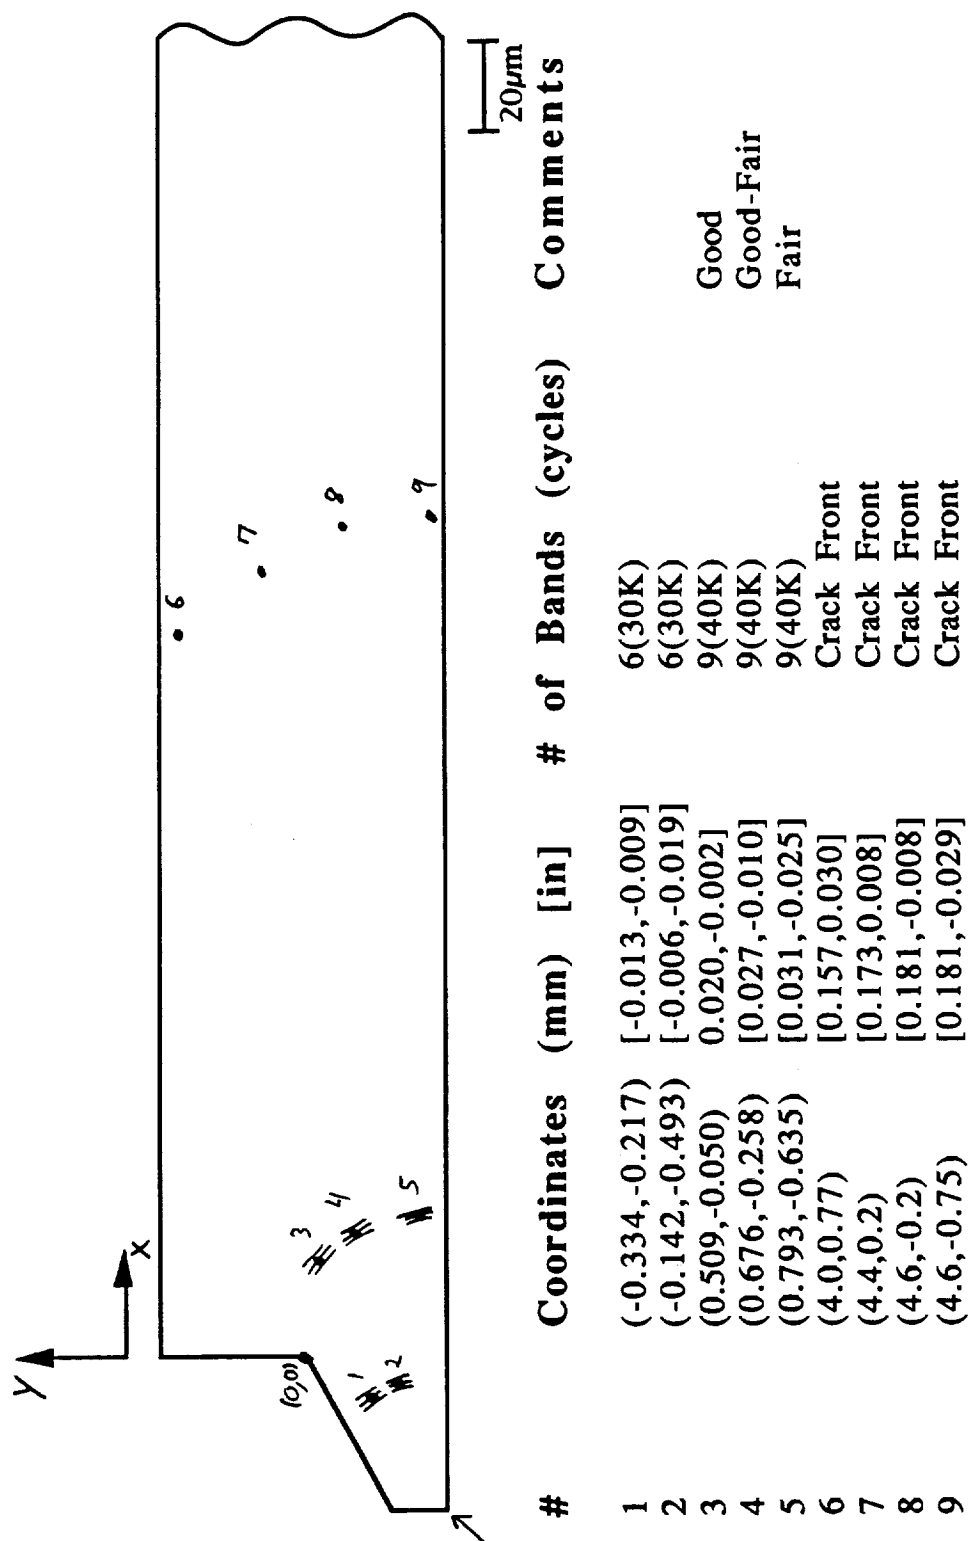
Rivet hole schematic: Upper rivet row, hole number 4J5, fatigue crack growth is in the forward direction.
